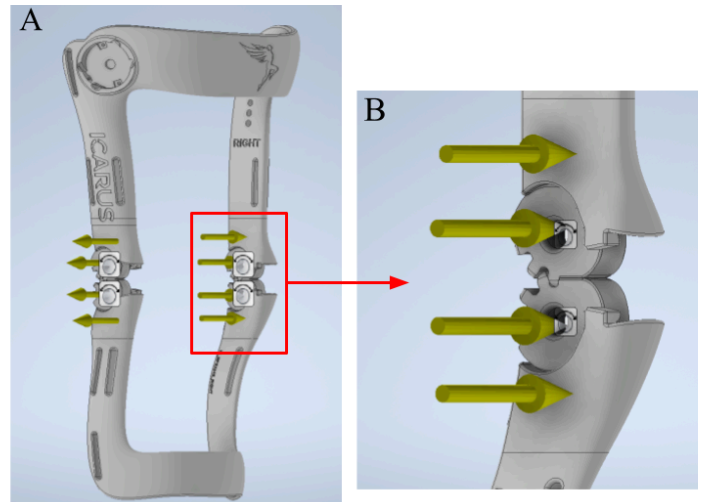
(A) Full view of the brace depicting the four locations of the faces (yellow arrows) for applied forces and the pin joint constraints in the gear holes (white boxes). (B) Zoomed in view of the pin joint constraints in the gear holes (white boxes) and locations for applied force on the faces of the gears and the body of the brace (yellow arrows).
